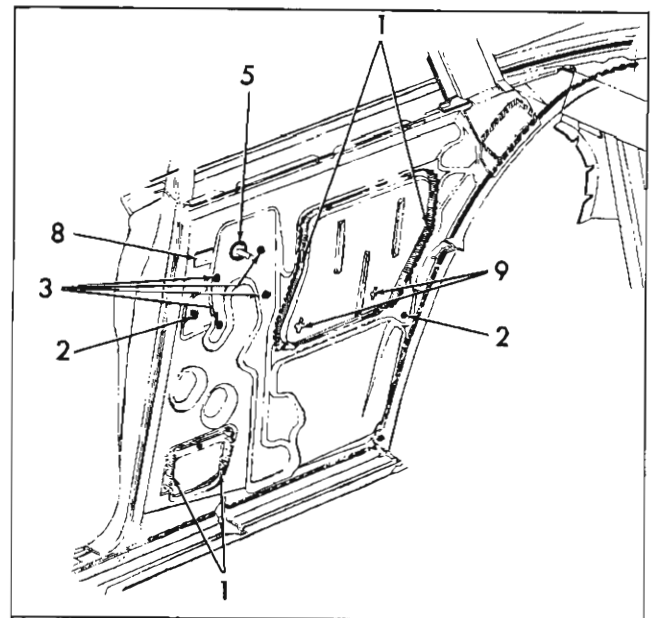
Rear Quarter Inner Panel Sealing—11 Styles—Manual
